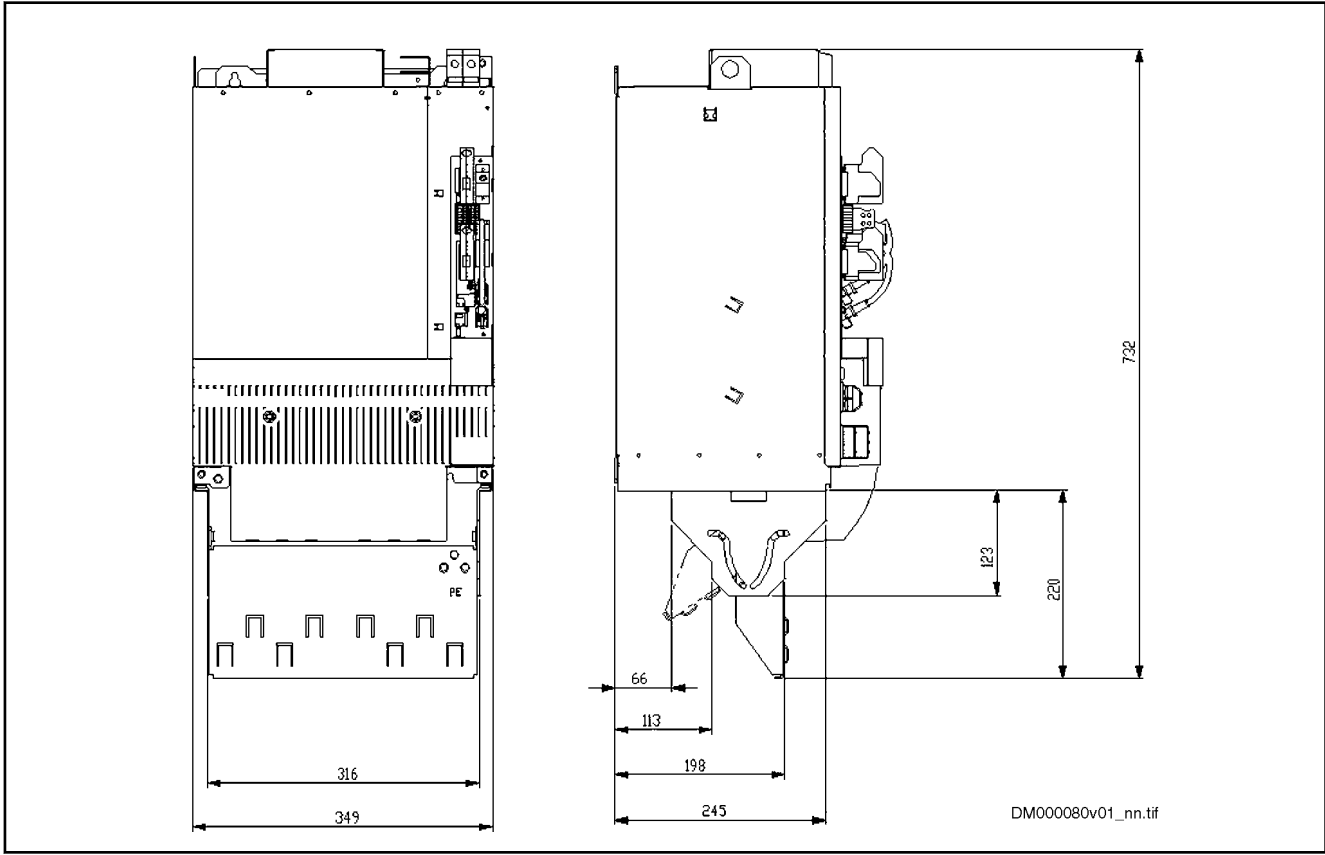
Dimensional drawing HCS03.1E-W0210 with HAS02
